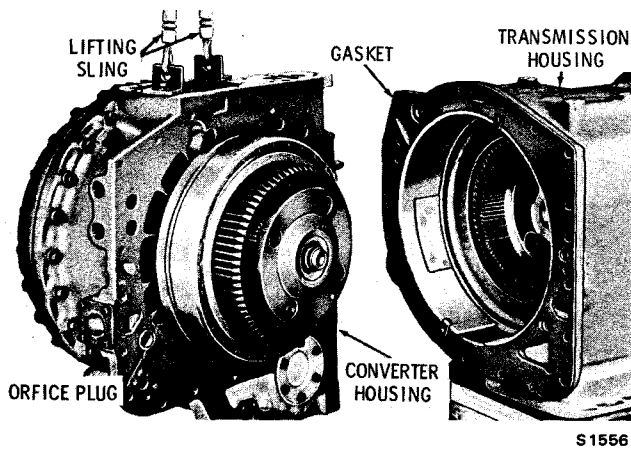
Removing torque converter and housing (CT, CLT, VCLT)
